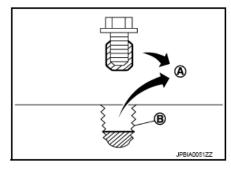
Removing Liquid Gasket From Bolt Hole And Thread Courtesy of NISSAN NORTH AMERICA, INC.
